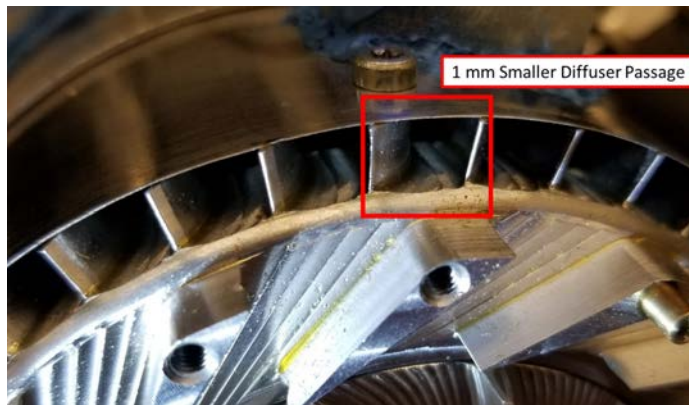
The front of the stock engine diffuser with the smaller vane passage highlighted.
